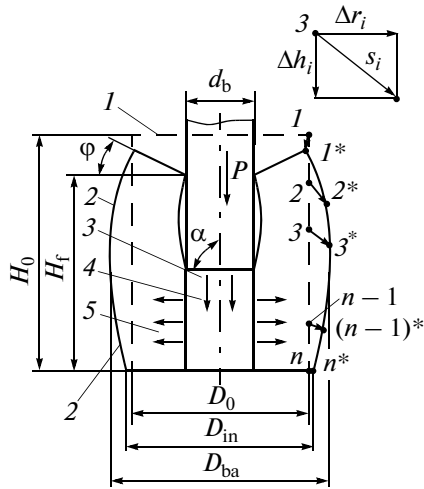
Determining the shaping parameters for a cylindrical blank in open broaching.
